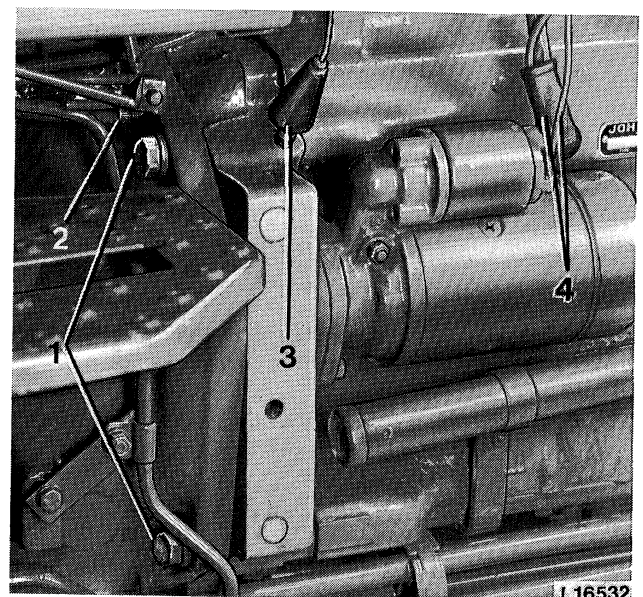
Separating between Engine and Clutch Housing, R.H. Side
